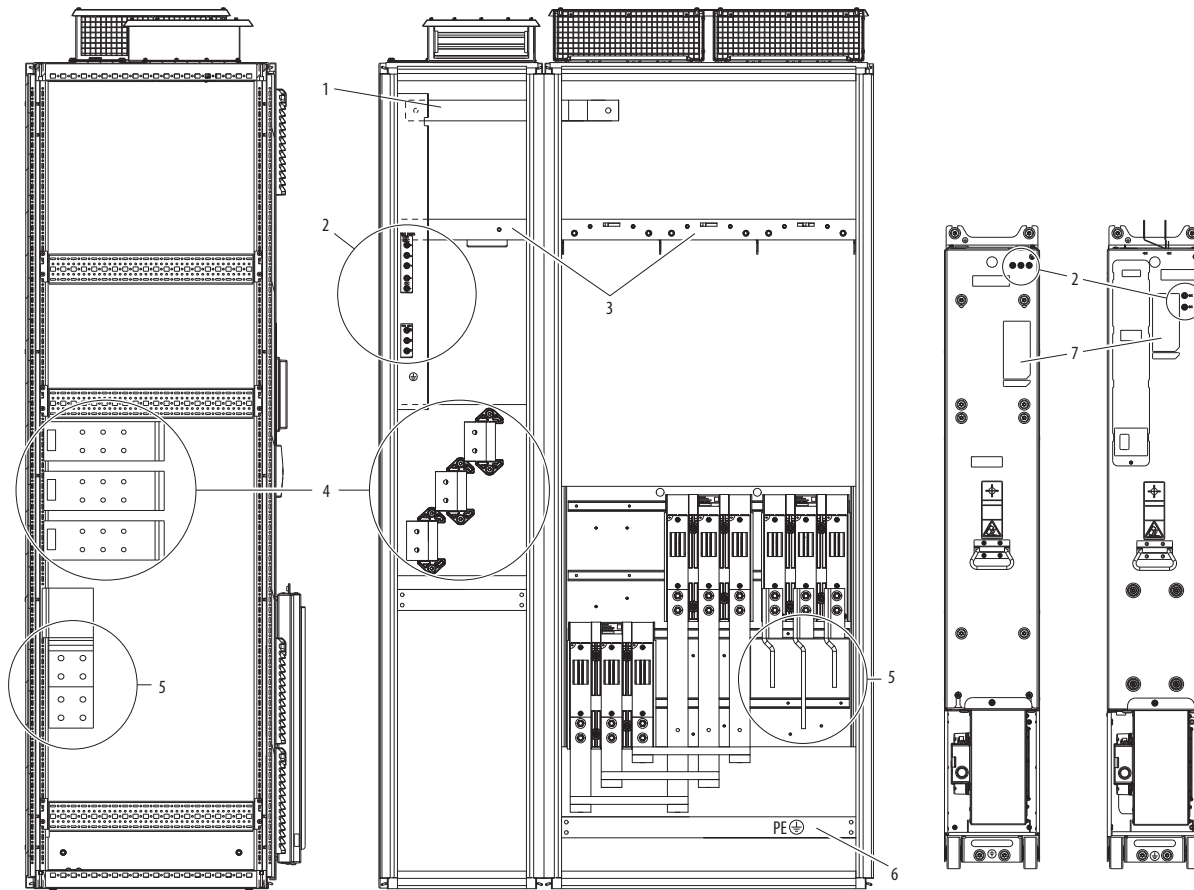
Typical Barrel Lug Connection to L-Bracket Options
